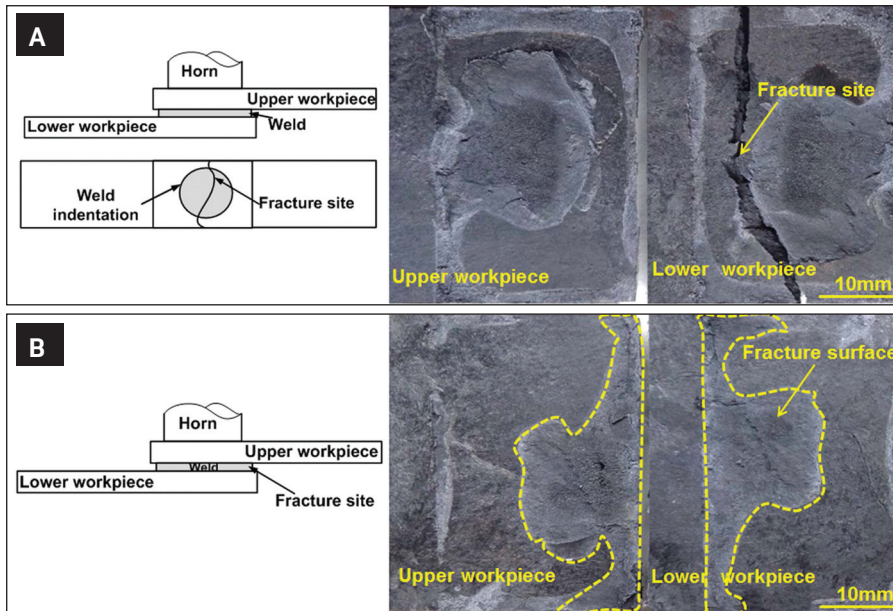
Effect of horn misalignment on the fracture mode for ultrasonic welded 4-mm- (0.16-in.-) thick C_f/PA 66 composite: A — 2; B — 6 deg.
